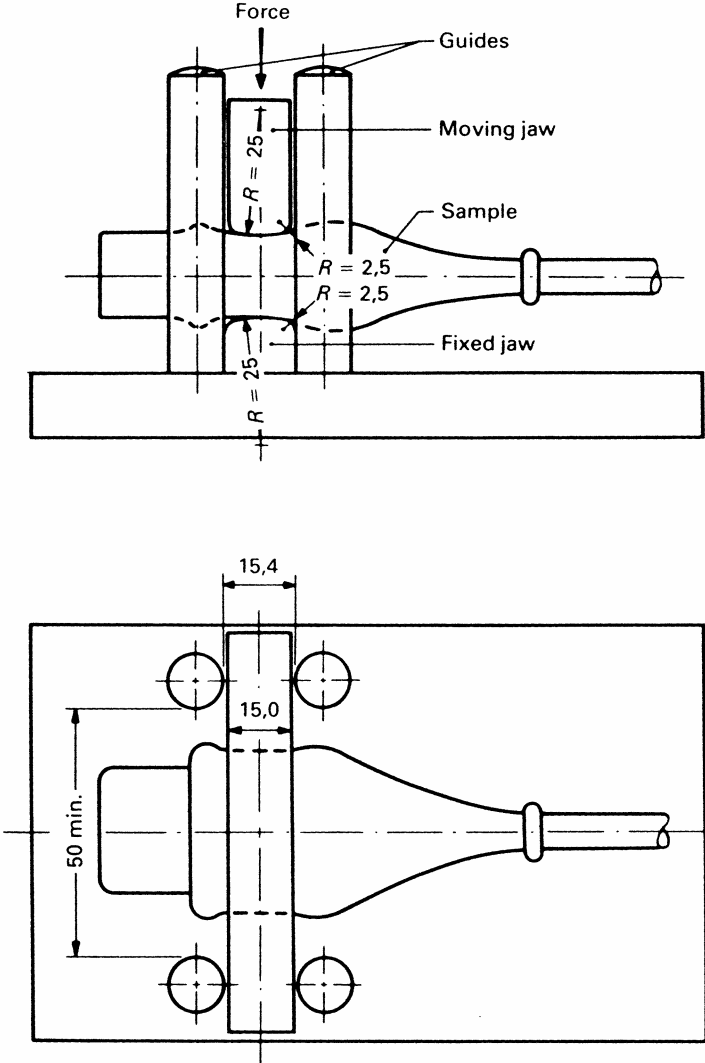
Blades for checking the resistance against deformation of the front part of the connector to standard sheet C7 (see 23.6)
